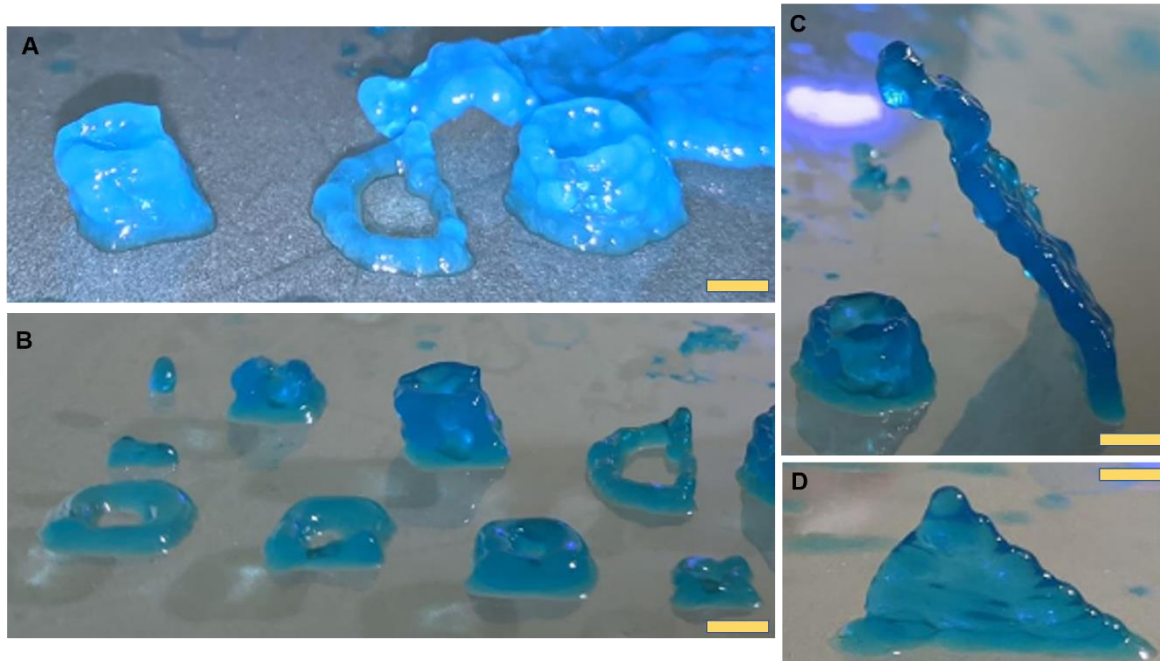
Printing attempts for multi-layer NGM parts. (A) Examples of 1- to 4-layer cylindrical structures, scale bar: 5mm. (B) Examples of 1- to 5-layer cylindrical structures, front row printed in the absence of plotting medium, scale bar: 6mm. (C) A 5-layer cylinder and a 14-layer triangular tilted wall (side view), scale bar: 6mm. (D) A 12-layer triangular wall similar with the one in C, tilted forward (front view), scale bar: 3mm. Blue dye: food color (Americolor, USA).
